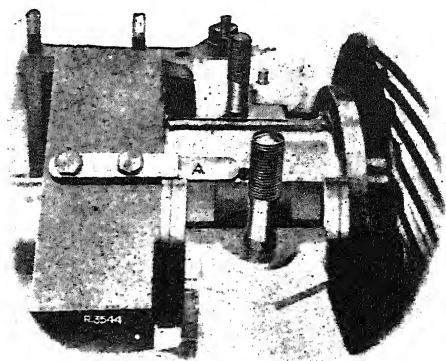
TOOL FOR REMOVING AND REPLACING CRANKSHAFT BEARINGS
